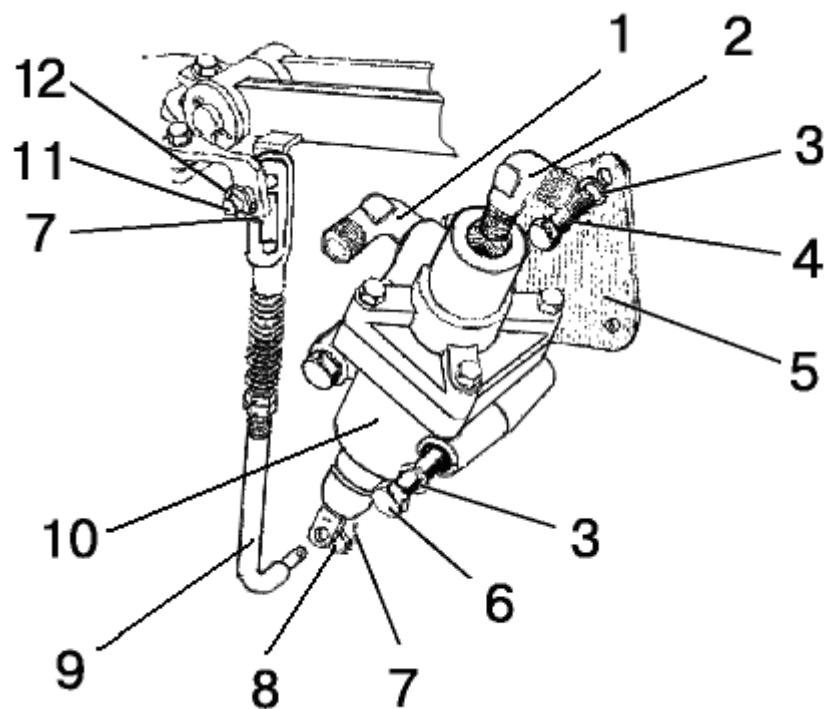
Brake valve (for single-line pneumatic actuator)
